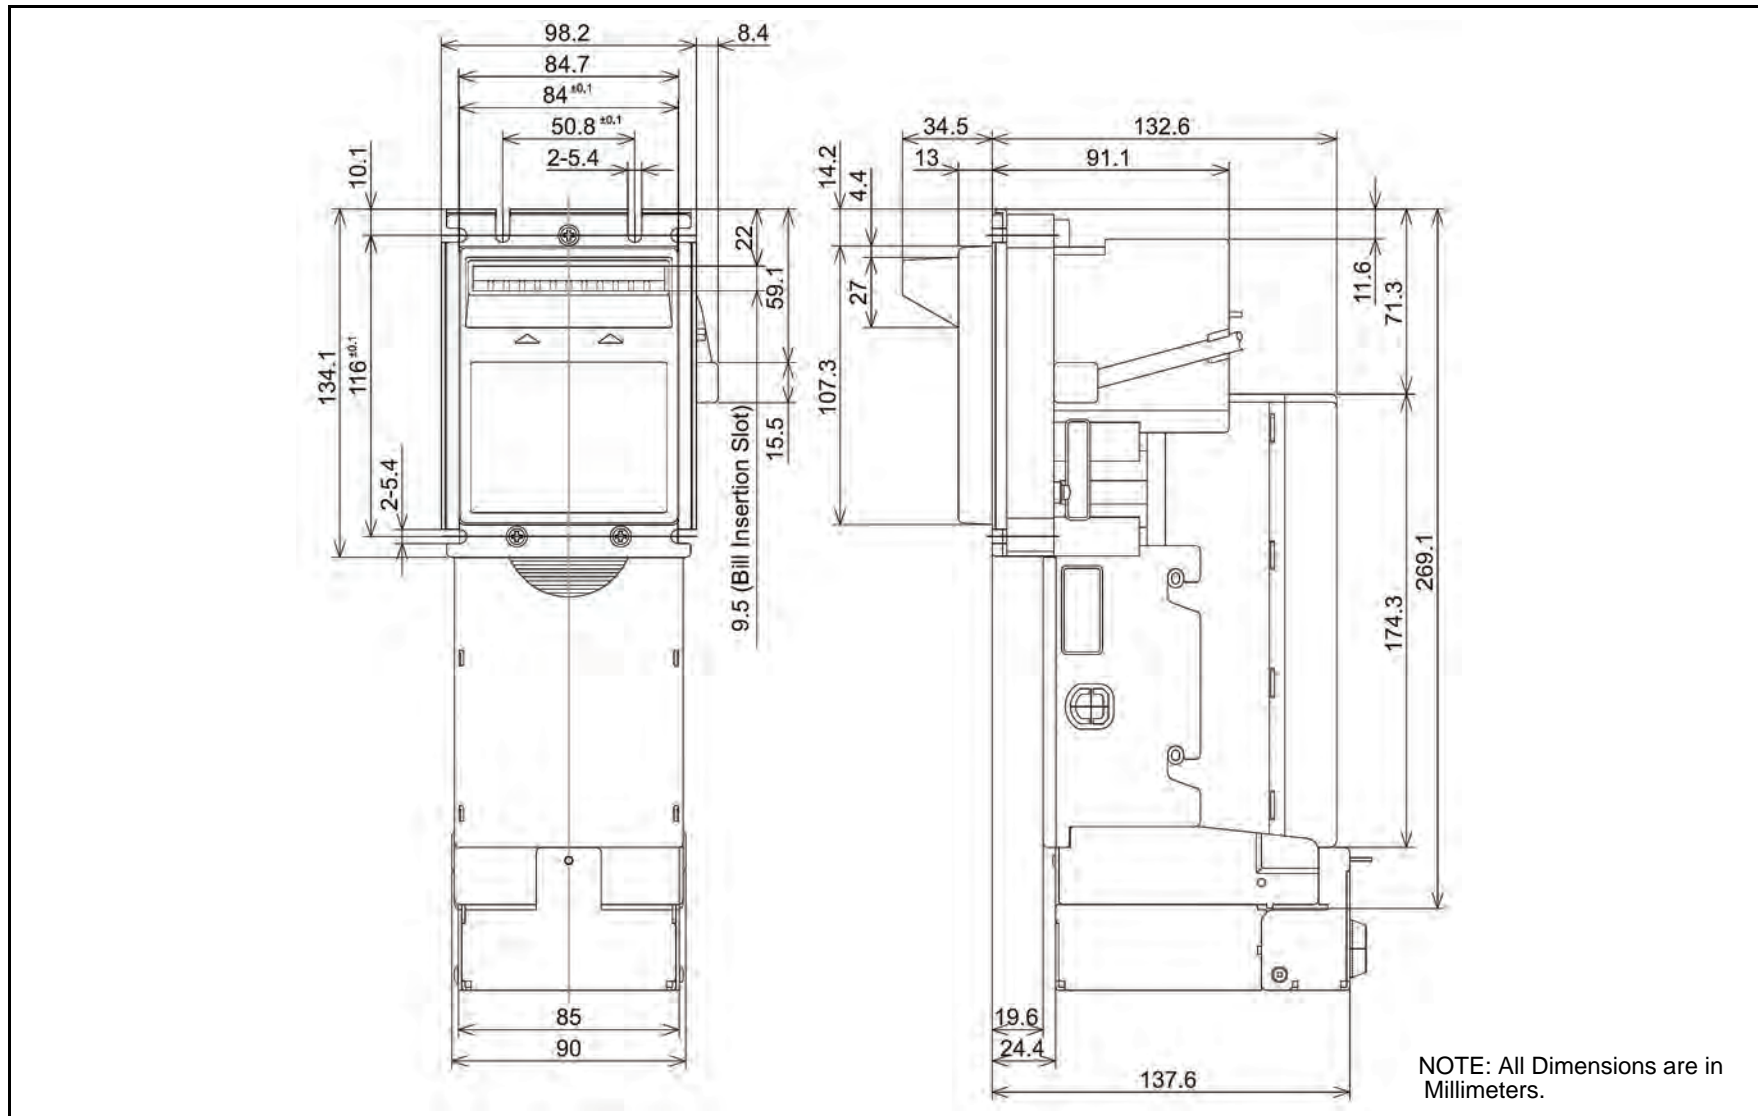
DBV-30X -SD Bill Validator Dimensions with a Type “A” Note Cash Box & Lock Assembly (Part 5)
